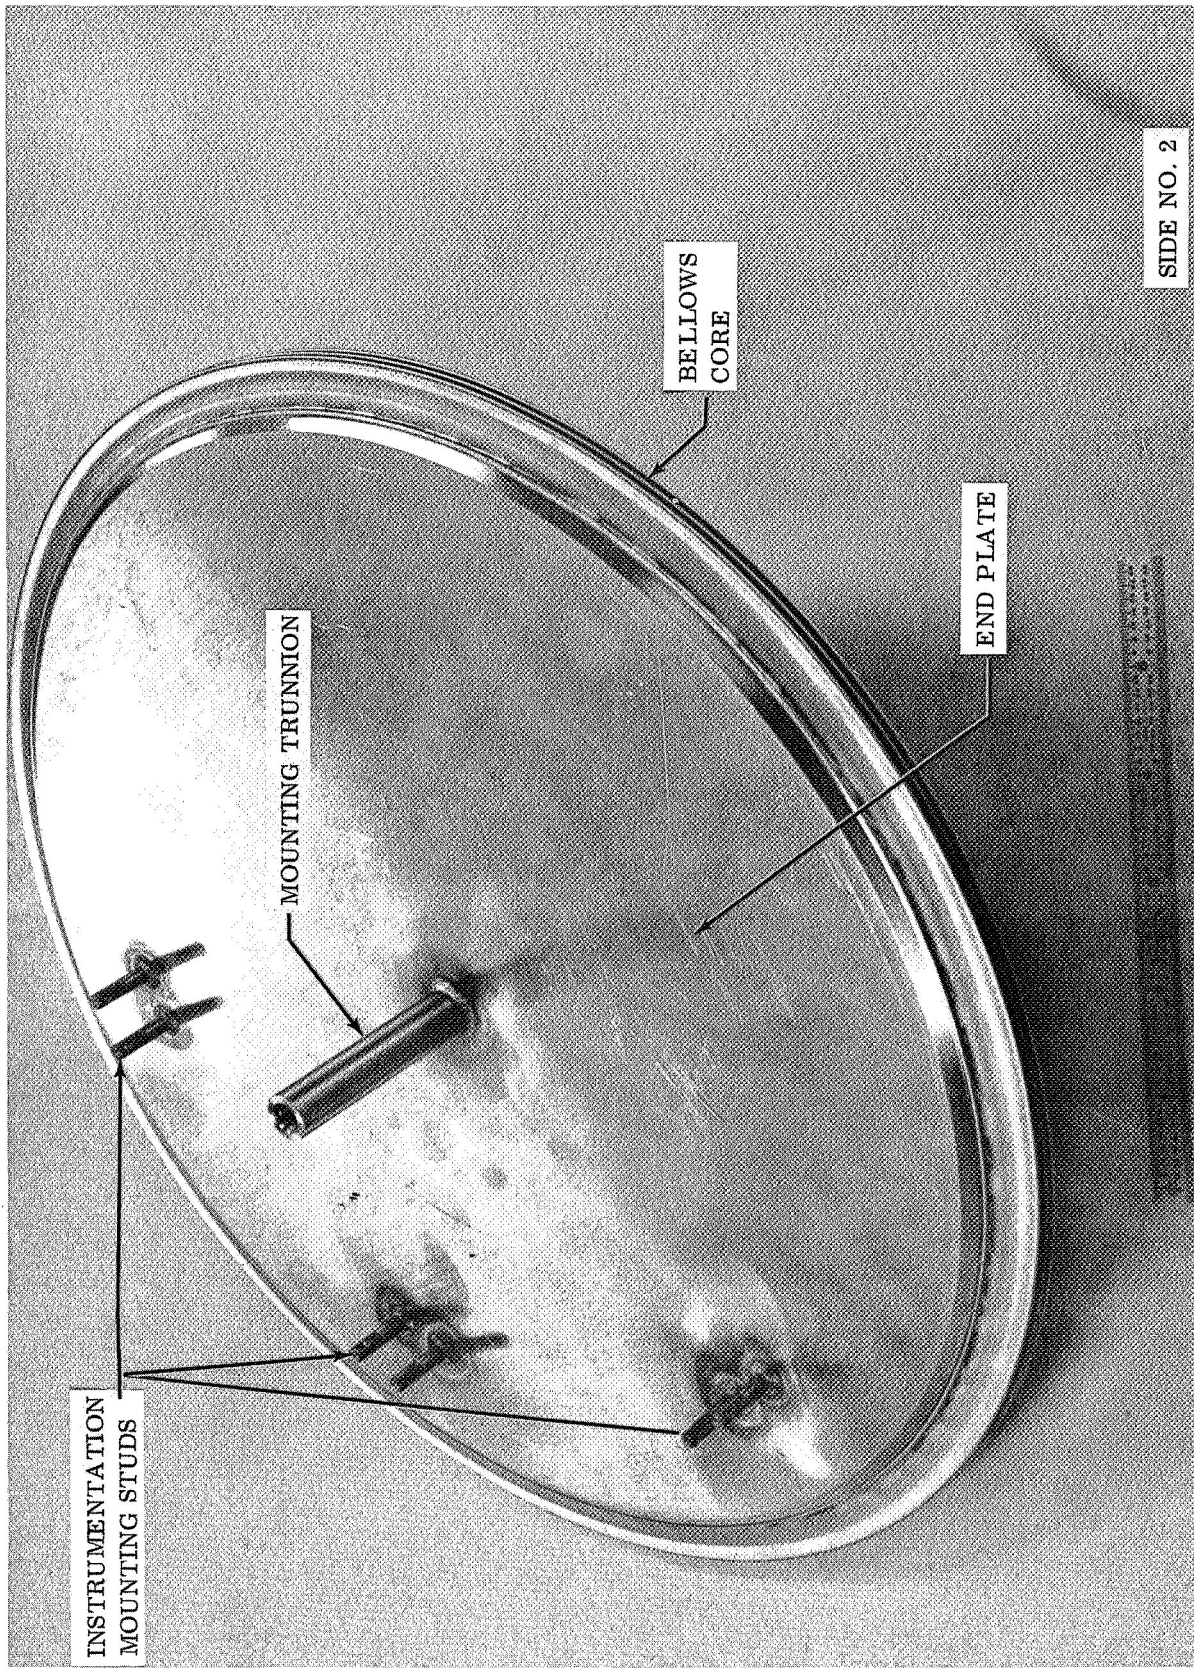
CLOSED SIDE BELLOWS TEST SPECIMEN ASSEMBLY
